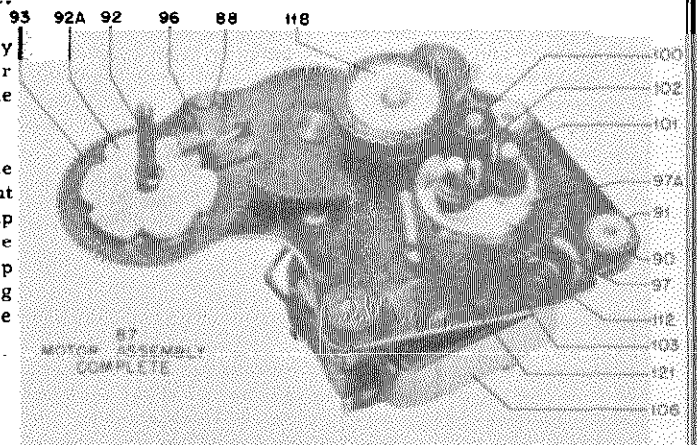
MOTOR & SPEED CHANGING ASSEMBLY
